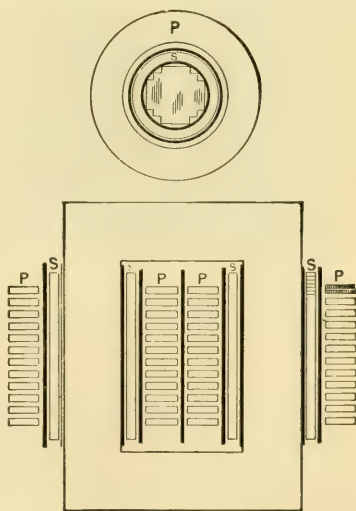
Concentric Disc-cylinder Coil Windings for Core-type Transformers.
